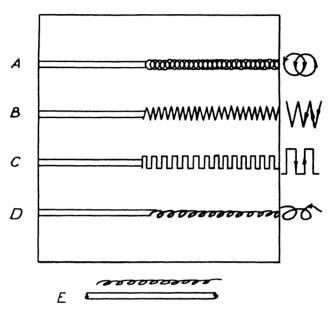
Torch Motions: A. Circular motion, B. Oscillating motion, C. Cross motion, D. Oval motion, this motion is also slightly into and out of the weld puddle as shown in E
